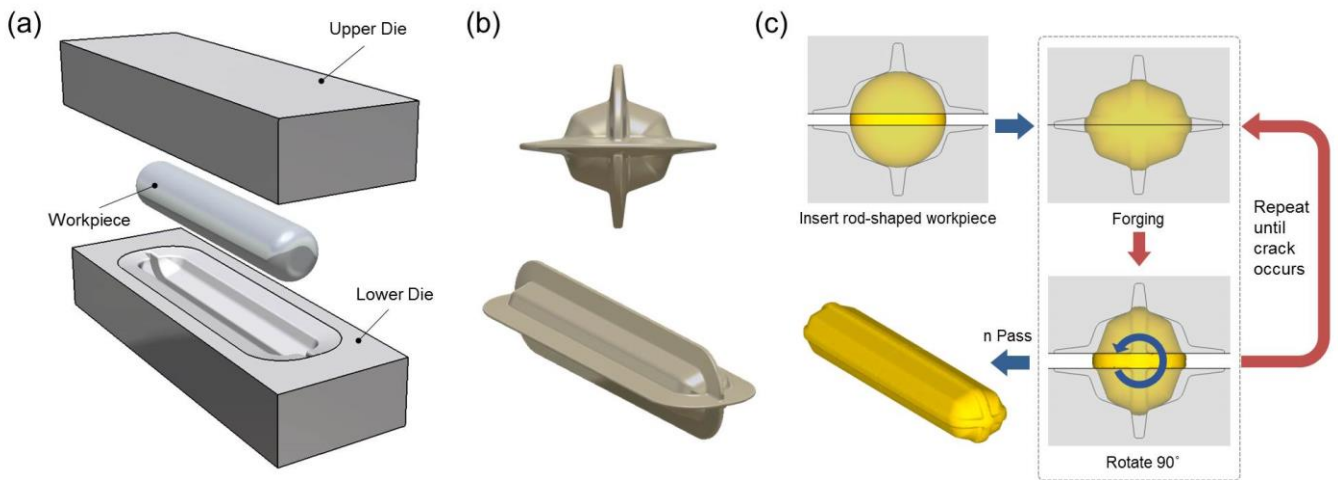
Schematic 3D views of (a) dies and workpiece for multi-forging, (b) die cavity shape, and (c) biaxial alternative forging process
